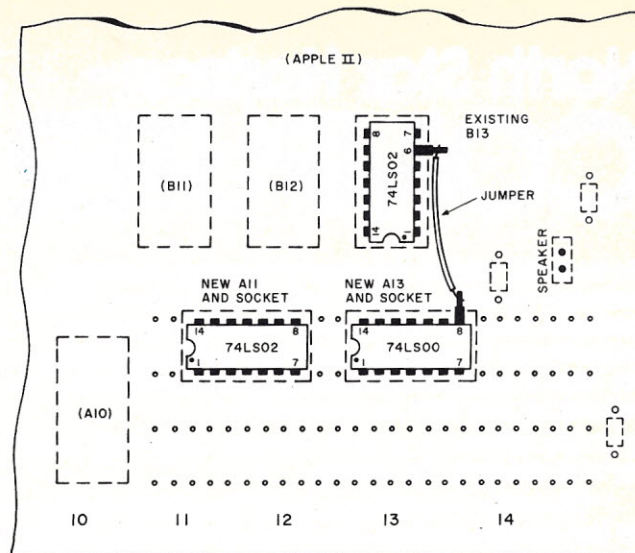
Top view of lowercase modifications. Jumper shown eliminates the need for foil cut.
